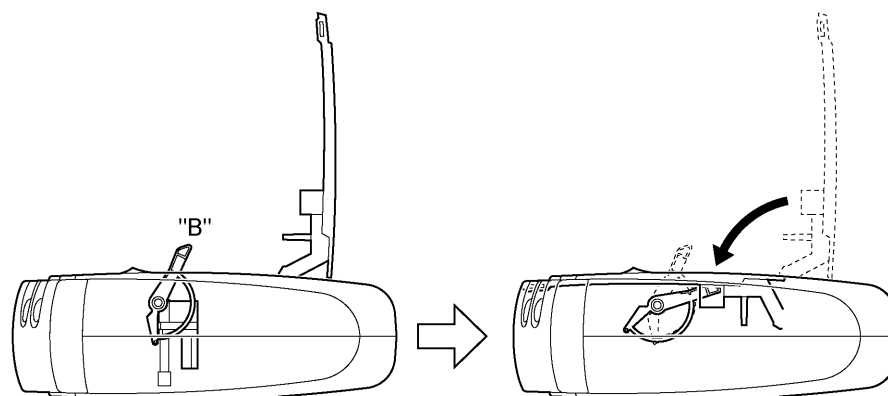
Platen-head Contact Switching Mechanism According to Tape Cassette
